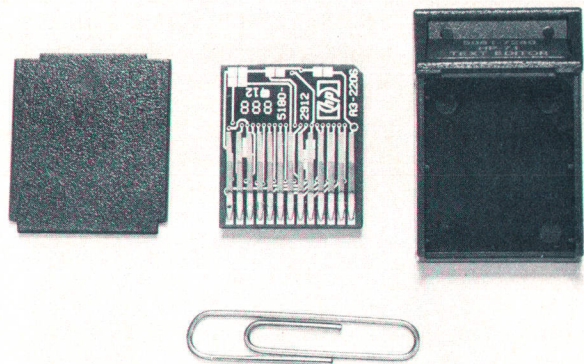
Exploded view of a typical plug-in module for the HP-71B. The ROM is surface-mounted on the underside of the printed circuit board in the center.
